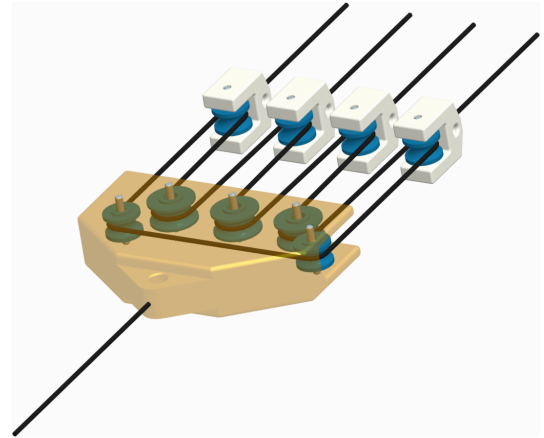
CAD MODEL OF THE FLOATING CLOSED-LOOP-CABLE MECHANISM.
